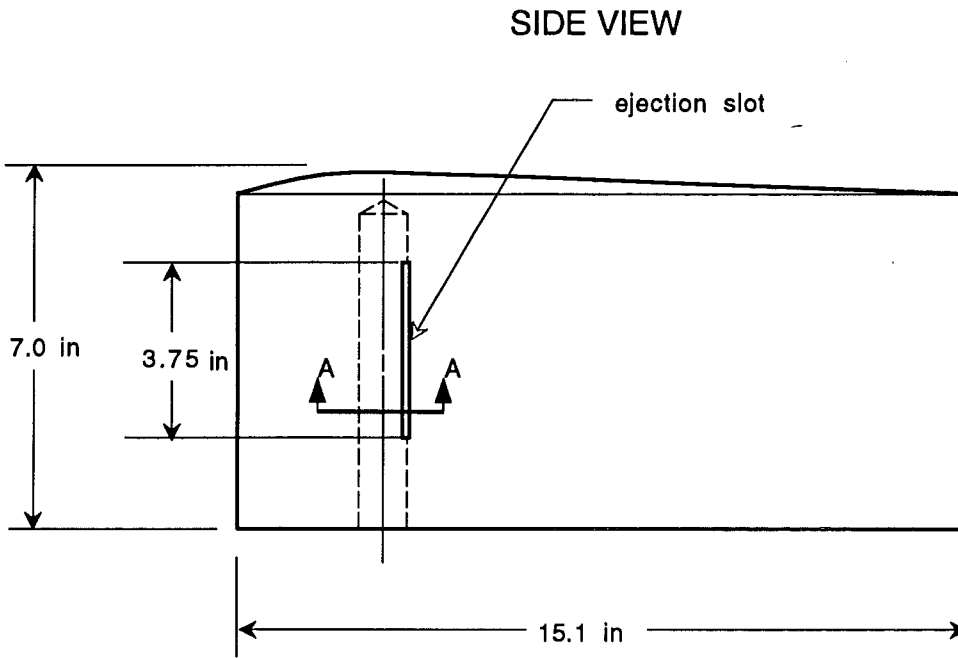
Schematic of Polymer Ejecting Hydrofoil Mounted on Water Tunnel Wall
